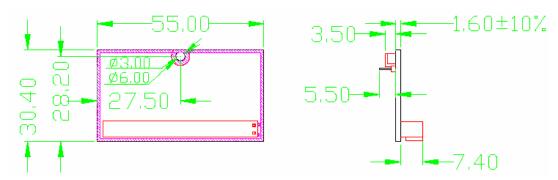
Mechanical Dimensions of iDiskOnChip, 40-Pin Horizontal Version
